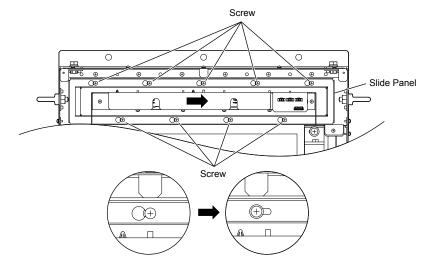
Remove the Fan Unit: 4A0414 to 4A0590
